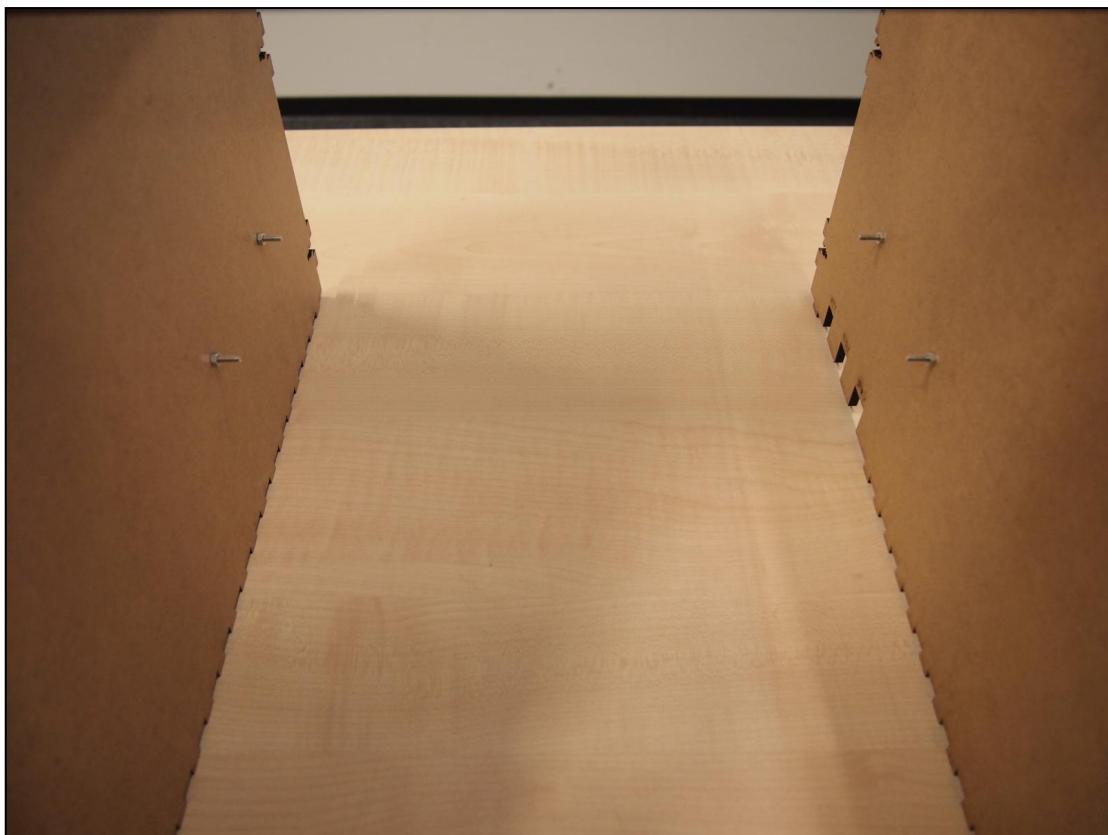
Insert four DIN 912 M3x16 screws and nuts in the holes on the side parts as shown.
